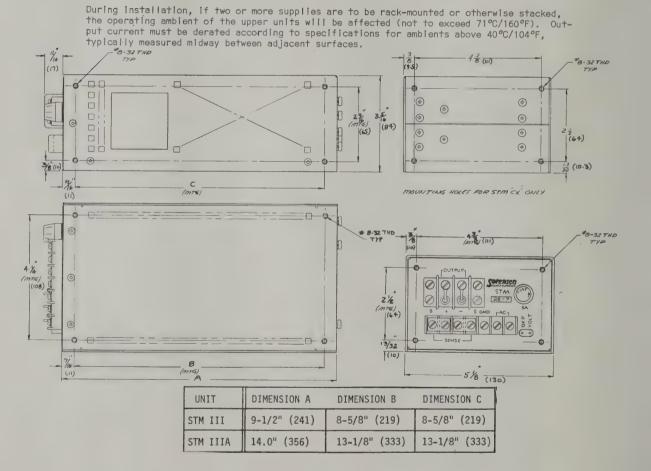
Outline Drawing, STM Modules III and IIIA
